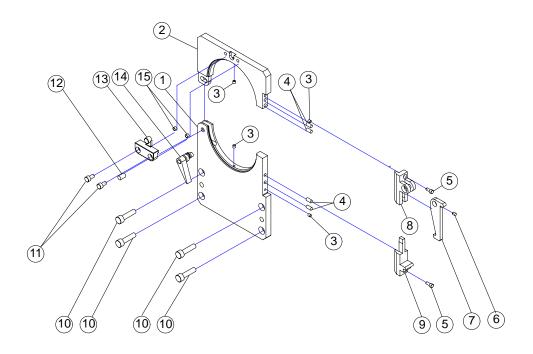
SWS-20FSP1L Special Purpose Fixture Block
